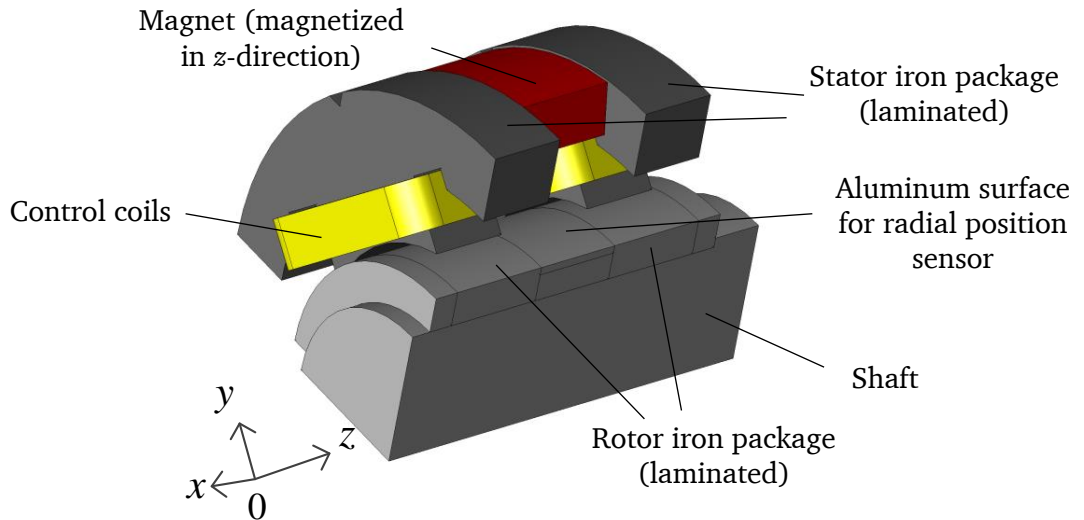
3D model of the radial magnetic bearing, built in *JMAG
